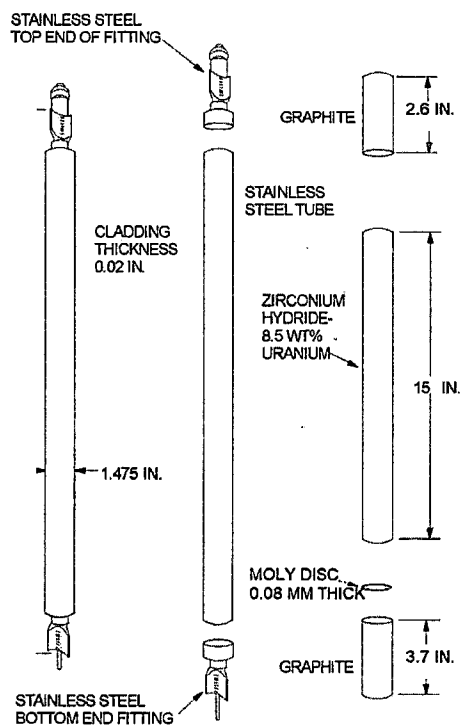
TRIGA® Stainless Steel Clad Fuel Element Design used in the NETL Core
